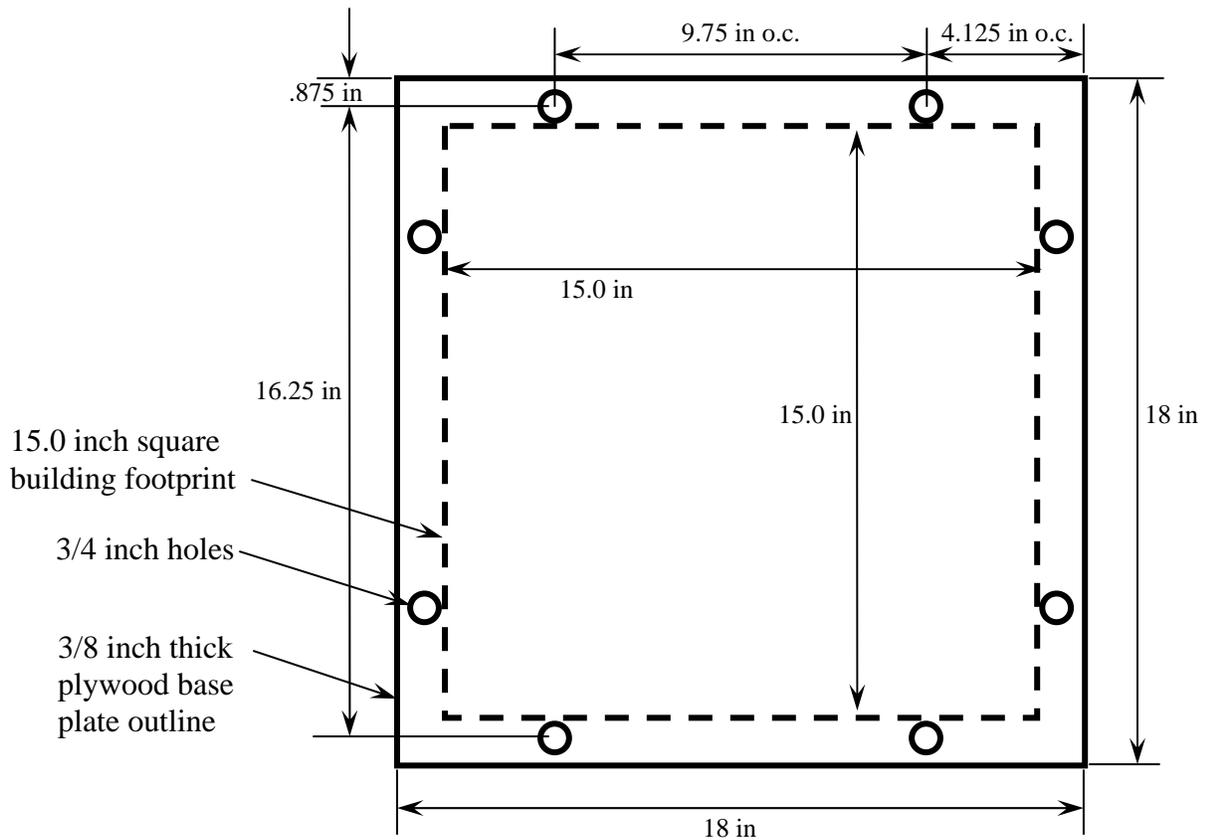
Engineering drawing of base plate to be fabricated by each team.
